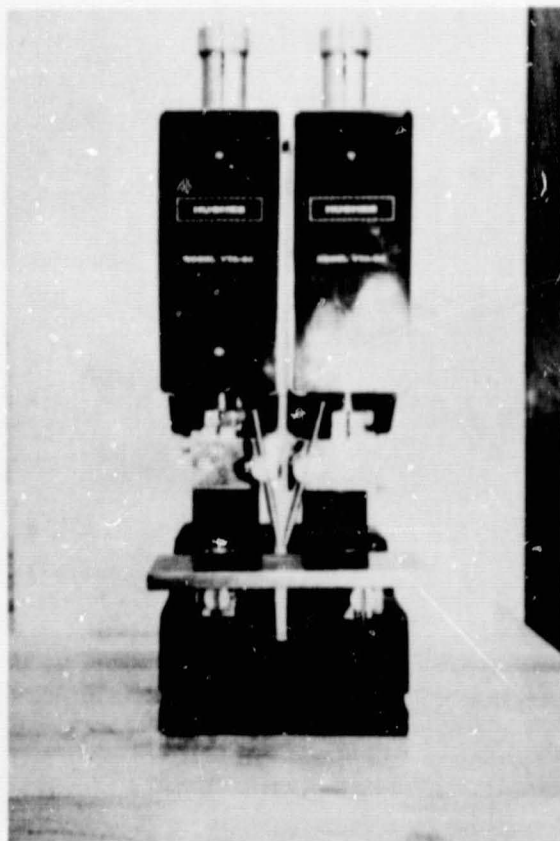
Weld Head with Manual Gap Adjustment
